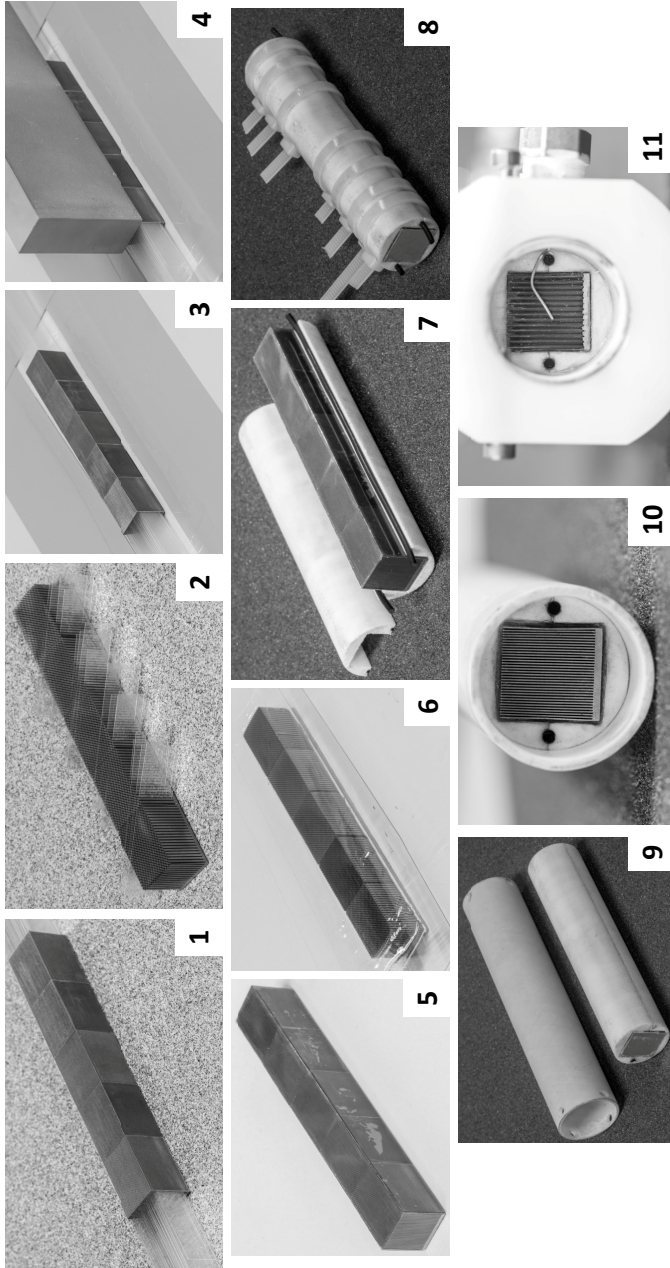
Steps of the assembly of the parallel plate and pin array matrices.
